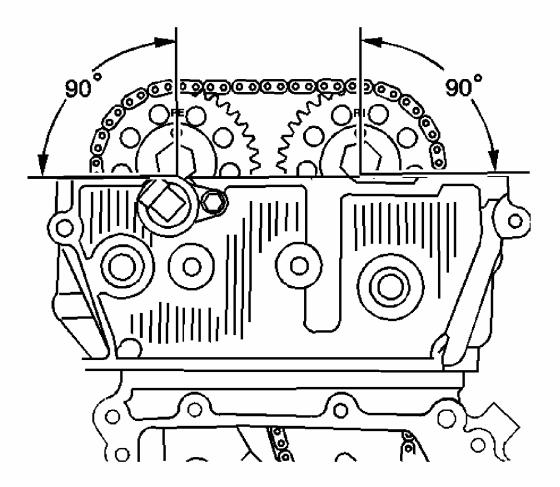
Ensuring Camshaft Sprocket Drive Pins Are At Top Of Their Rotation Courtesy of GENERAL MOTORS CORP.
